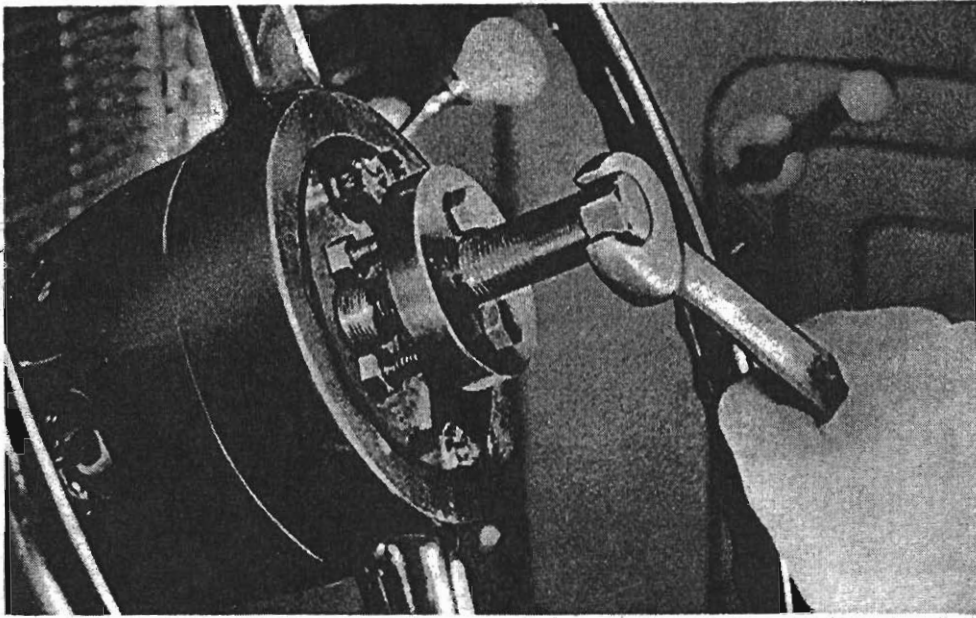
Remove the Steering Wheel Using the Steering Wheel Puller J-2557.
